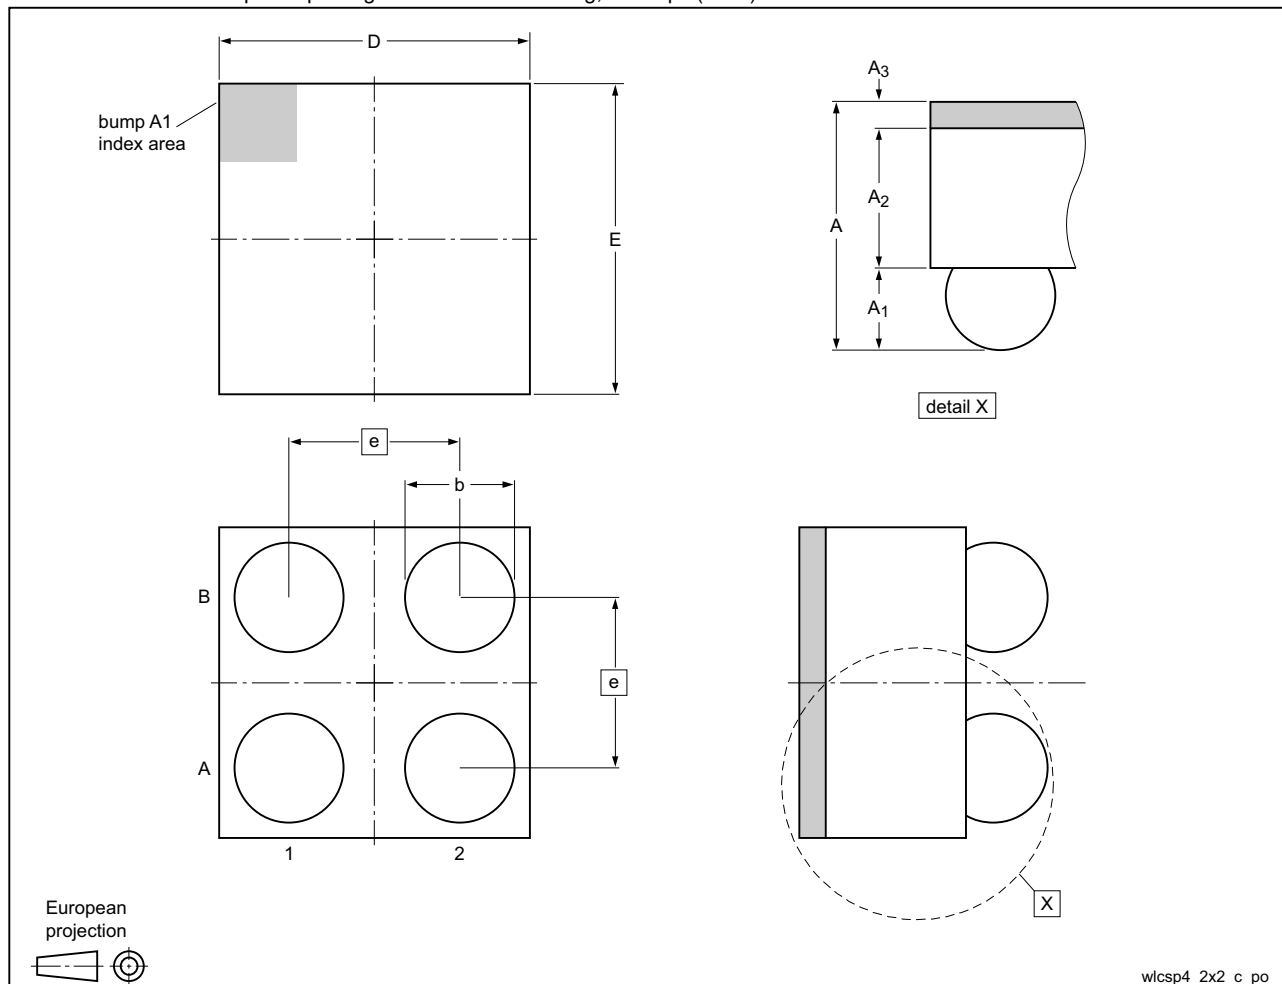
Package outline LD6836CX4/C (WLCSP4 with backside coating)
